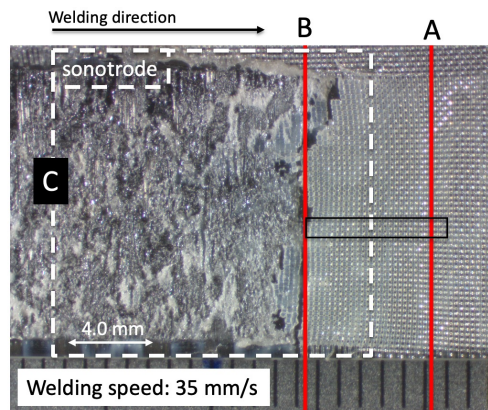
Representative partial fracture surface a weld stopped during the welding process before the entire seam was welded for the optimum welding speed 35 mm/s. A 500 N welding force and a vibrational amplitude of 80 μm were used. Stages A-B, and B-C have been indicated.
